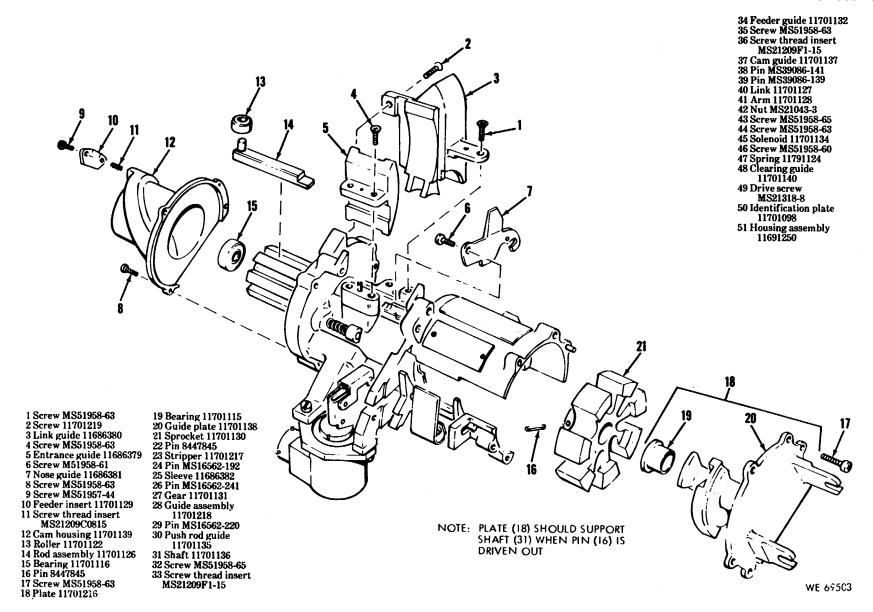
Delinking feeder MAU-56/A-exploded view (sheet 1 of 2)
